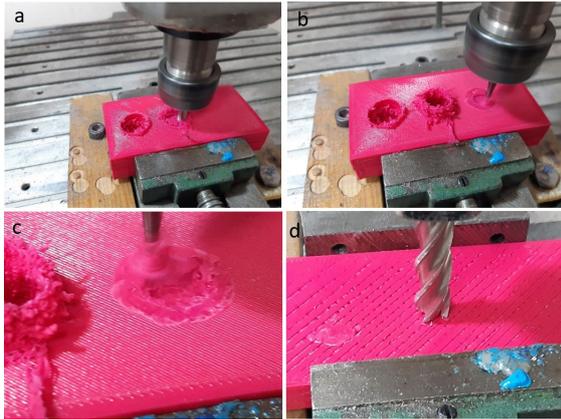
Machining of PLA parts with different characteristics using an end mill.
